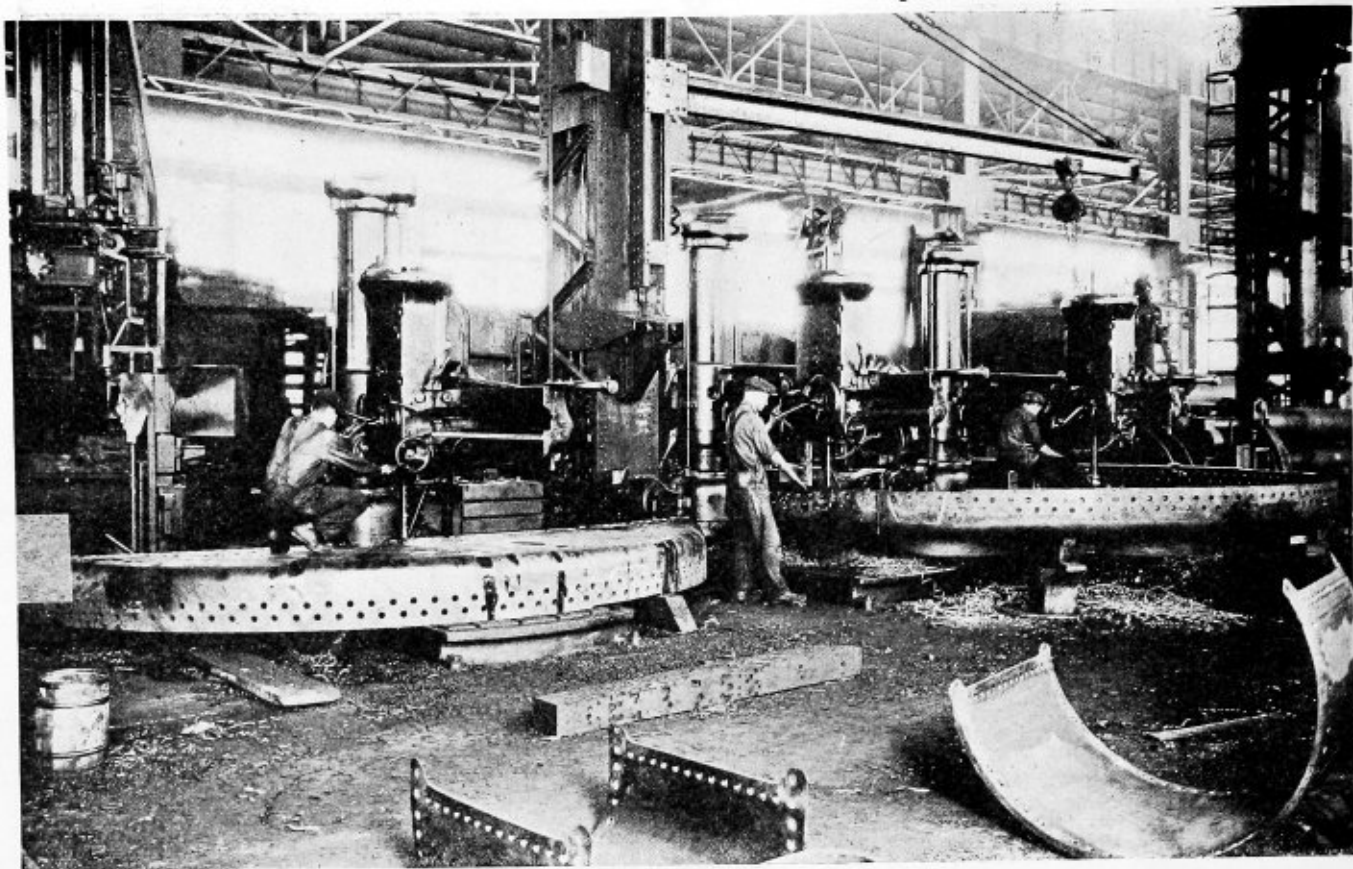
Cutting Tube Holes and Stayholes in Boiler Heads
